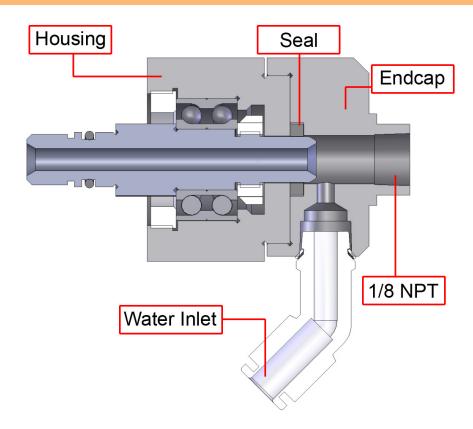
Cross-Section View of Wet Cut Rotary Union
